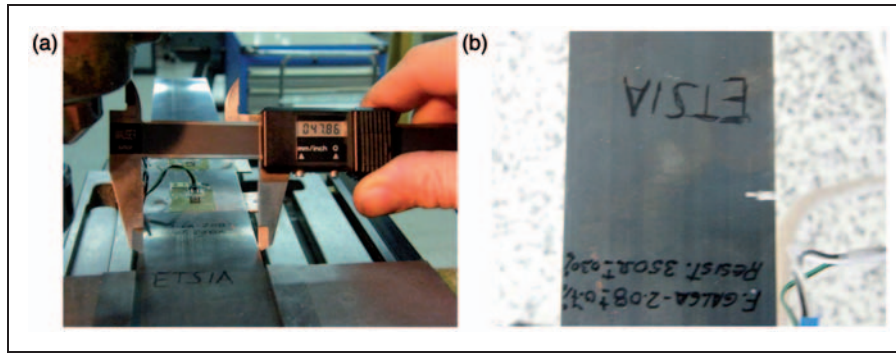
(a) Measurement of one of the cracks, and (b) Final specimen damaged.
